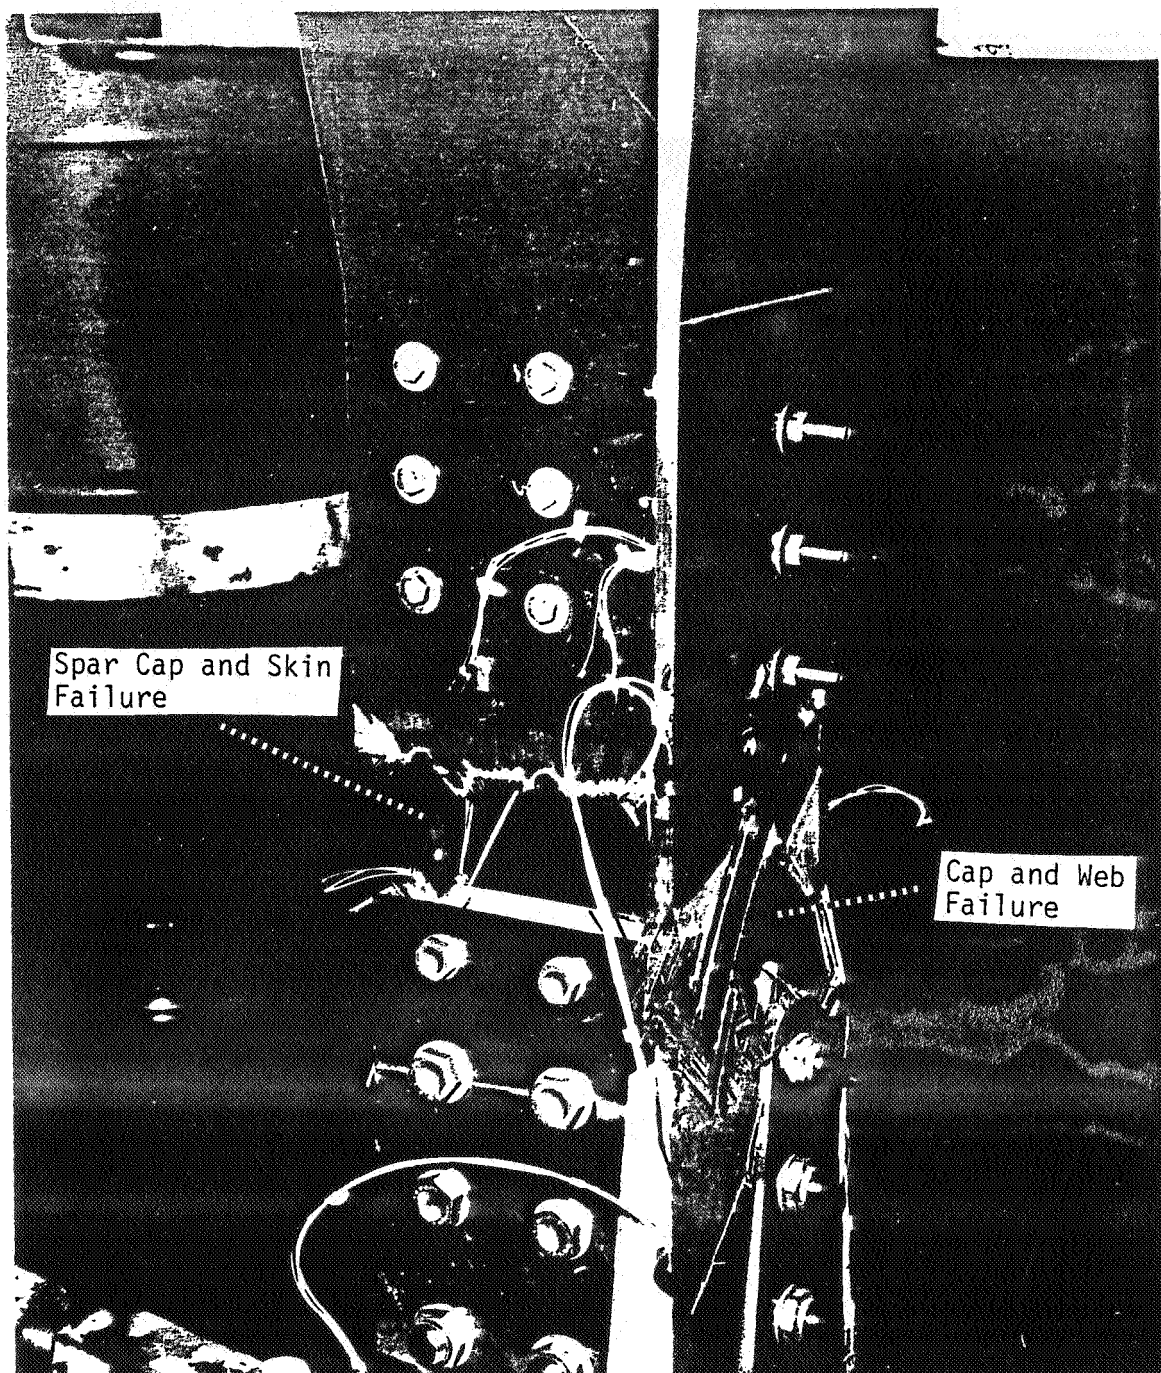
TECHNOLOGY DEMONSTRATION - TEST SECTION FAILURE
